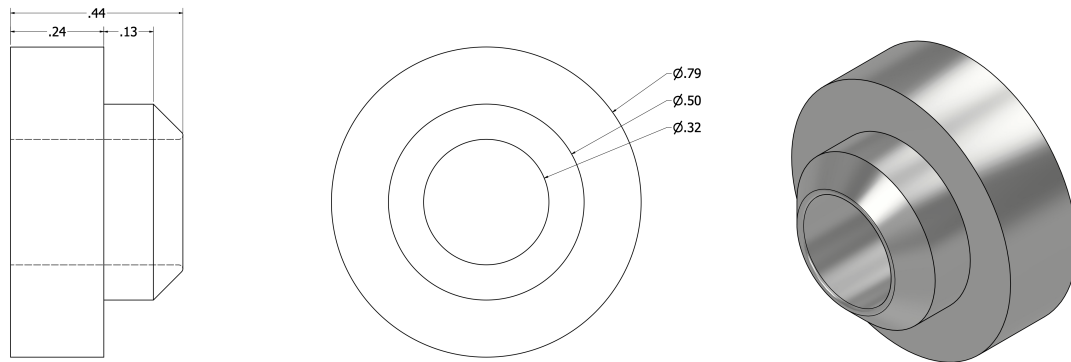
Imperial dimensions (in inches) for the custom 3-D printed “plug” component used in both end caps to compress the spacers, optical components, and most importantly, the silicon o-rings to form a vacuum seal. CAD model credit: Y. Ko.
